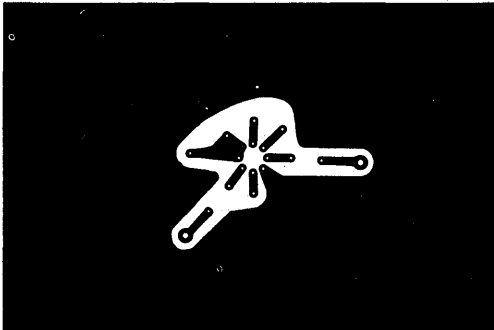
PC layout for 50-Ω line driver (see Fig. 6)
